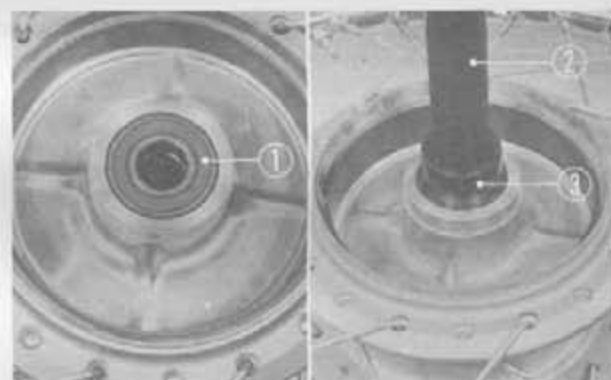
① Radial ball bearing ② Bearing driver ③ Bearing driver attachment
